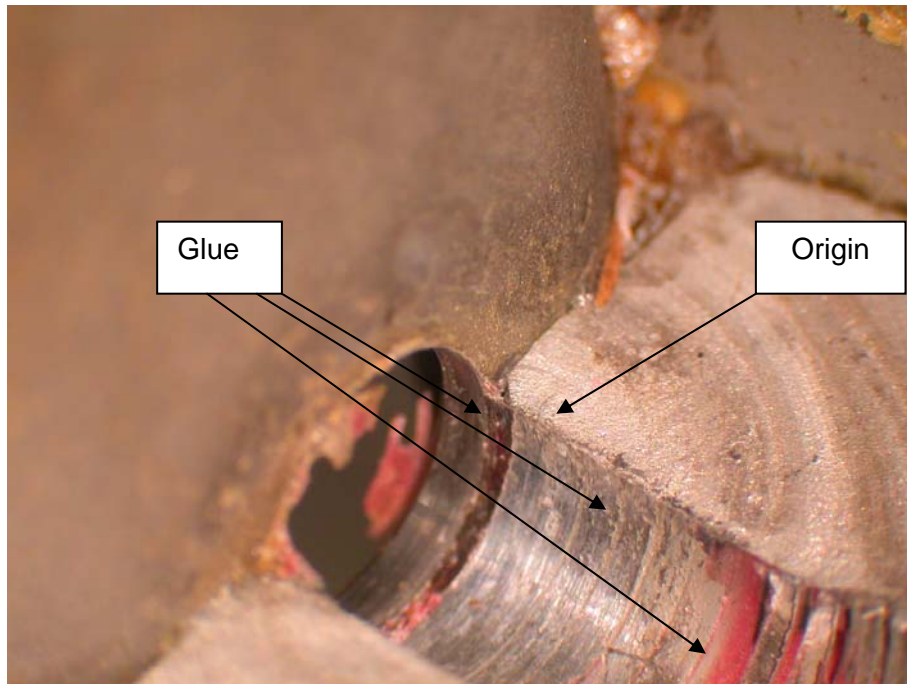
Bolt hole bore at position of fracture origin in root fitting.
